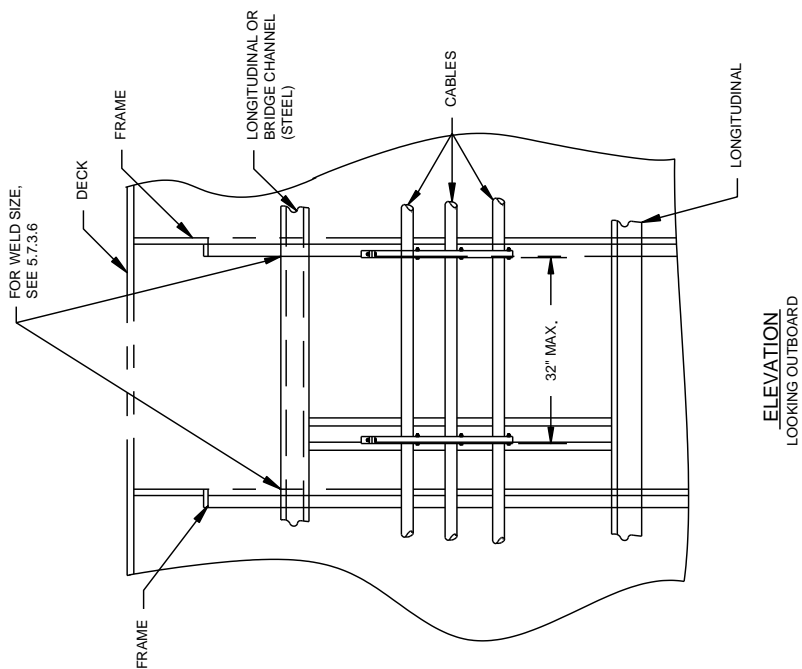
B75. Cable support for degaussing cables (surface ships).
